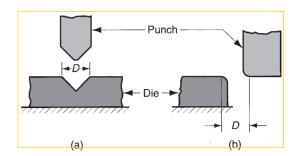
Die opening dimension D: (a) V-die, (b) wiping die.
